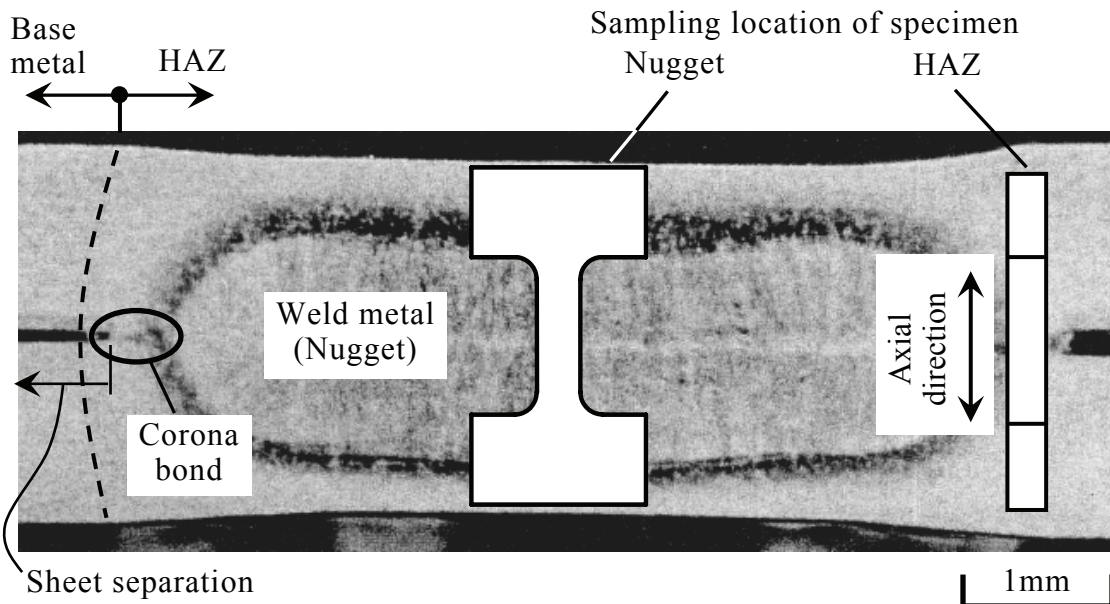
Cross section of spot weld and sampling locations of specimens.
